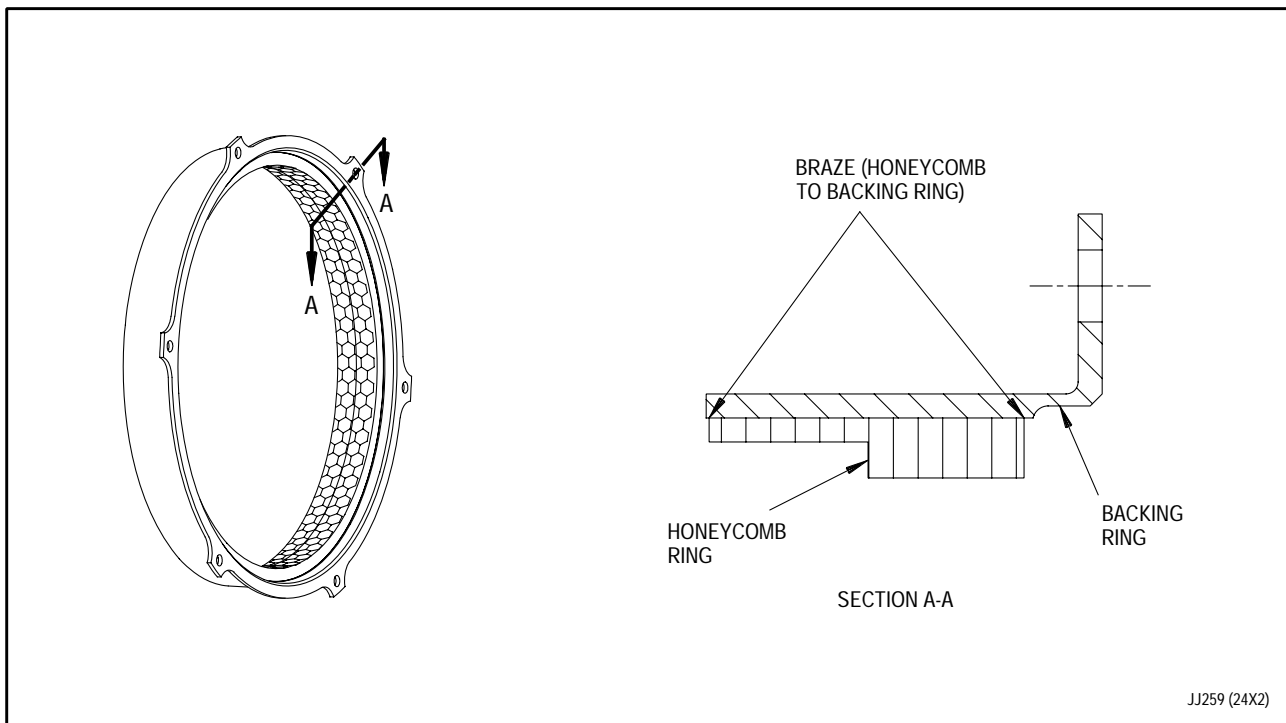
Third Stage (Inner) Turbine Air Sealing Ring Assembly - Blend Repair
